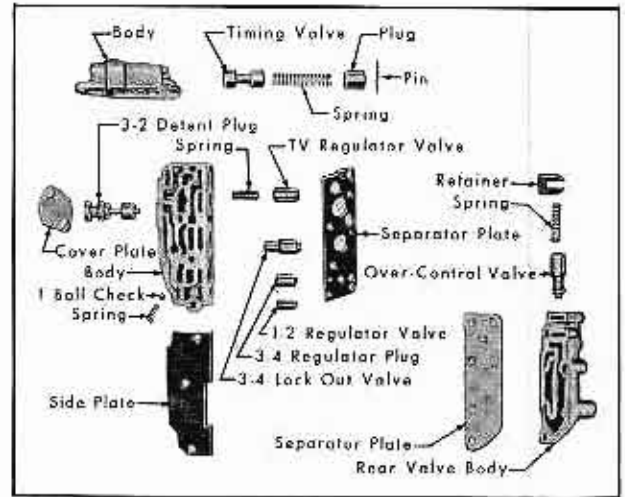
Timing, Rear, Front Valve Body - Disassembled
